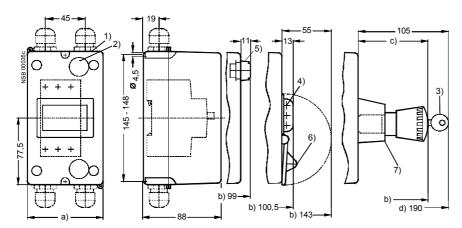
3RV19 13-1.... (for Frame size S00)
